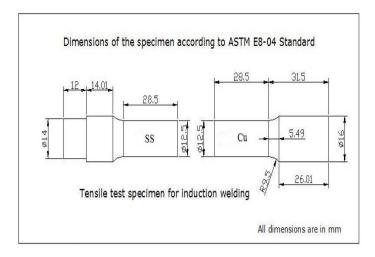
Dimension of Tensile specimen according to the ASTM E8-04 Standard.
